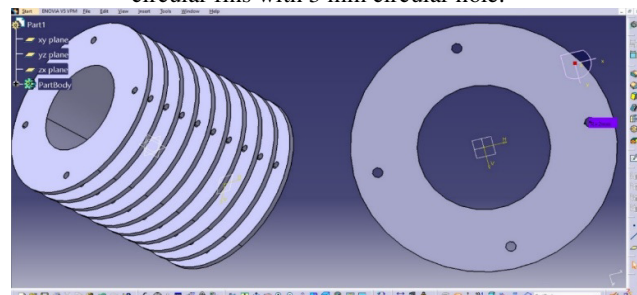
Geometric dimension of the cylindrical block having circular fins with 4 mm circular hole.
